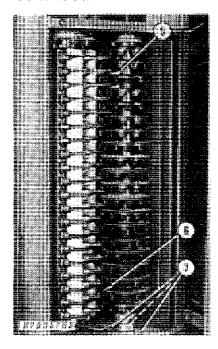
Positioning Doffer Assembly (Angle) (12-Bar Side Shown)
